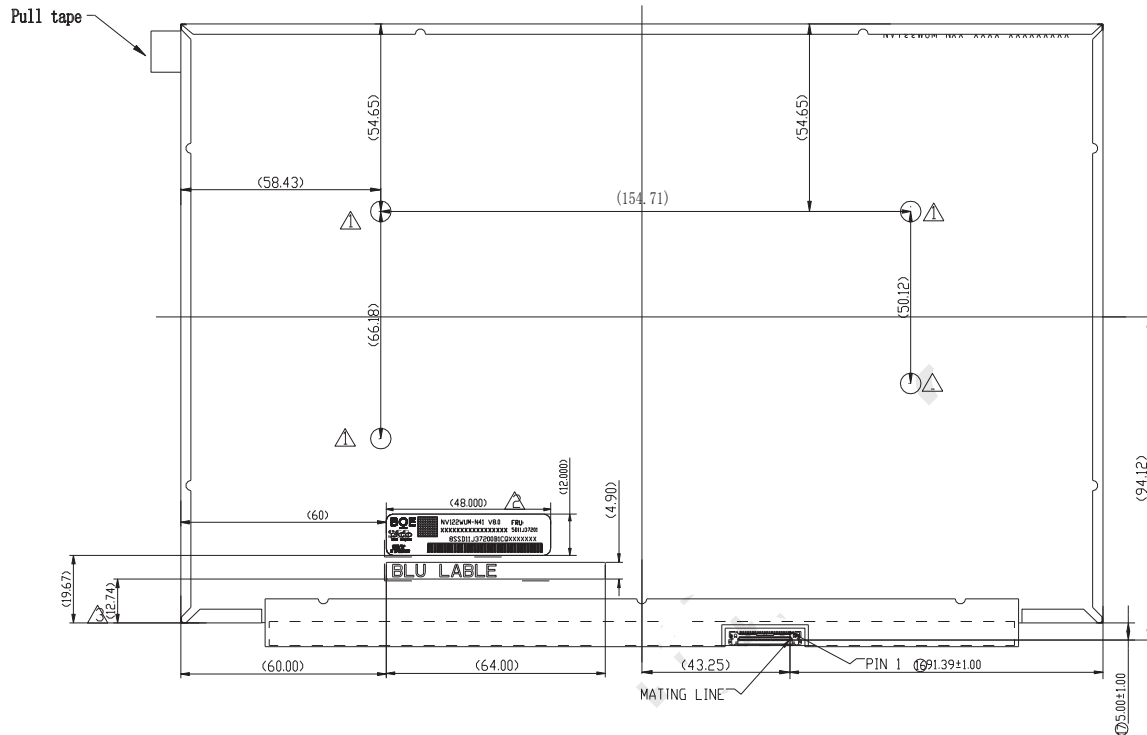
TFT-LCD Module Outline Dimensions (Rear view)
